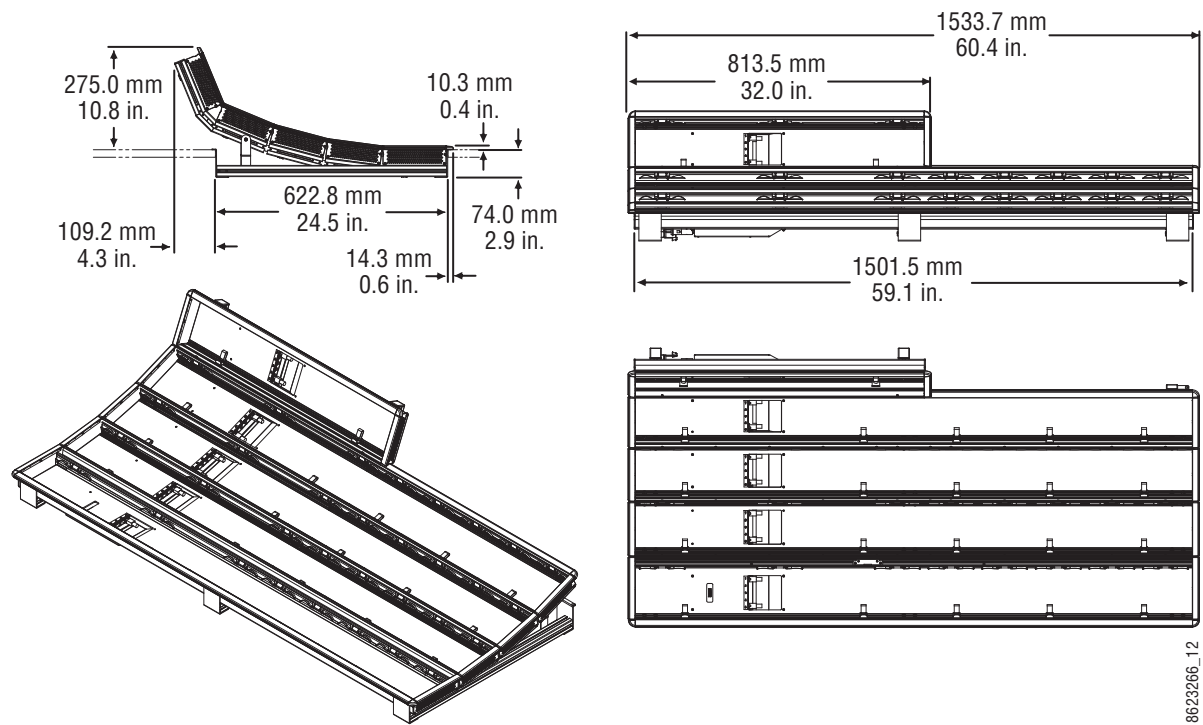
4-ME Control Panel Cutout Dimensions, Curved Installation
